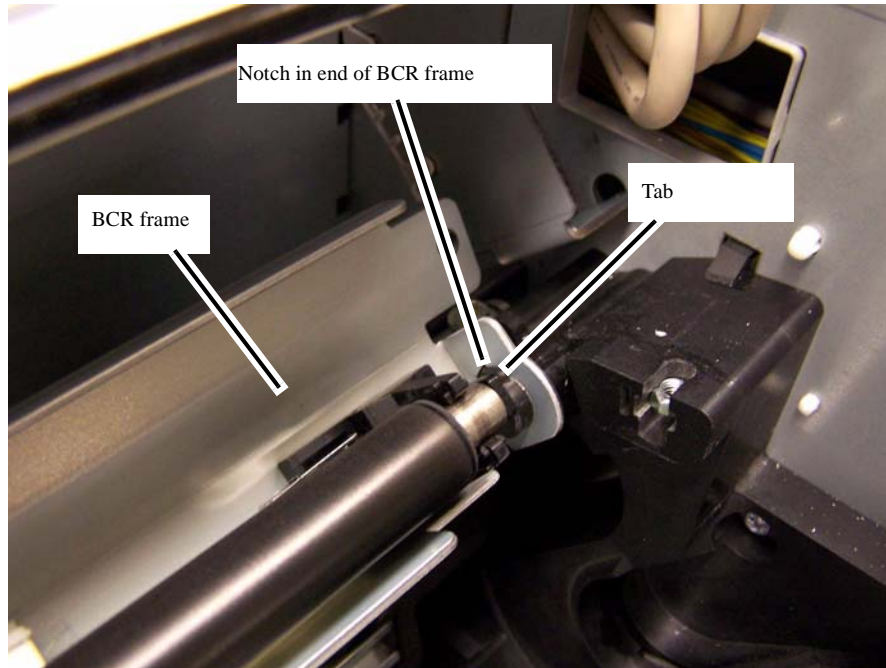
Aligning the notch and the tab to remove the right end of the assembly
